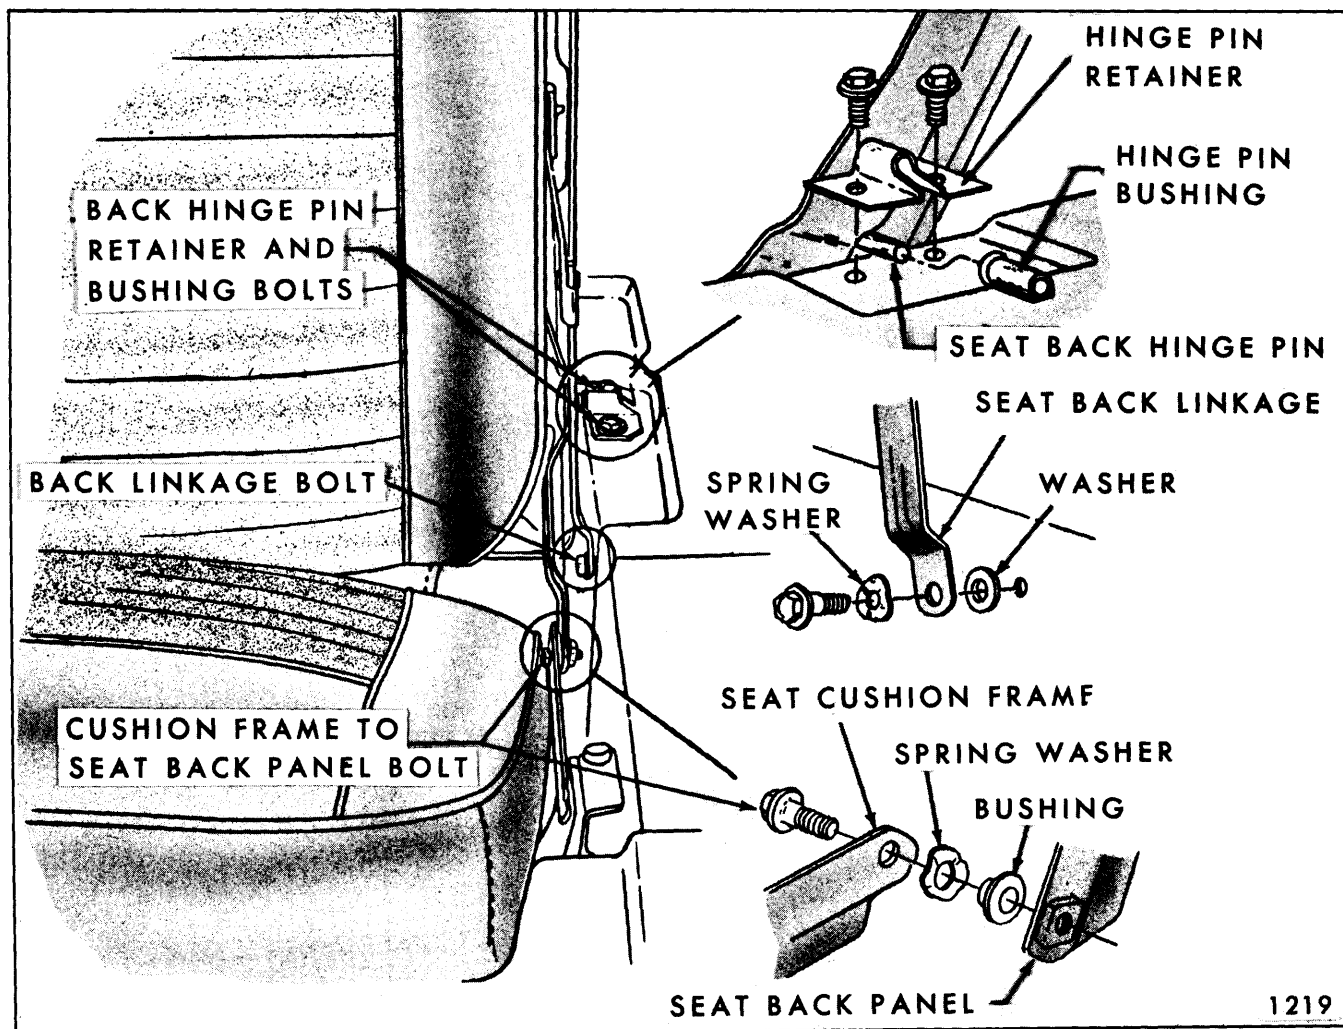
Folding Third Seat (Vista Cruiser and Sport Wagon Styles)
